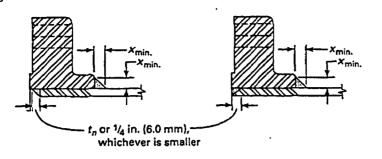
(A) FILLET WELD SIZE
